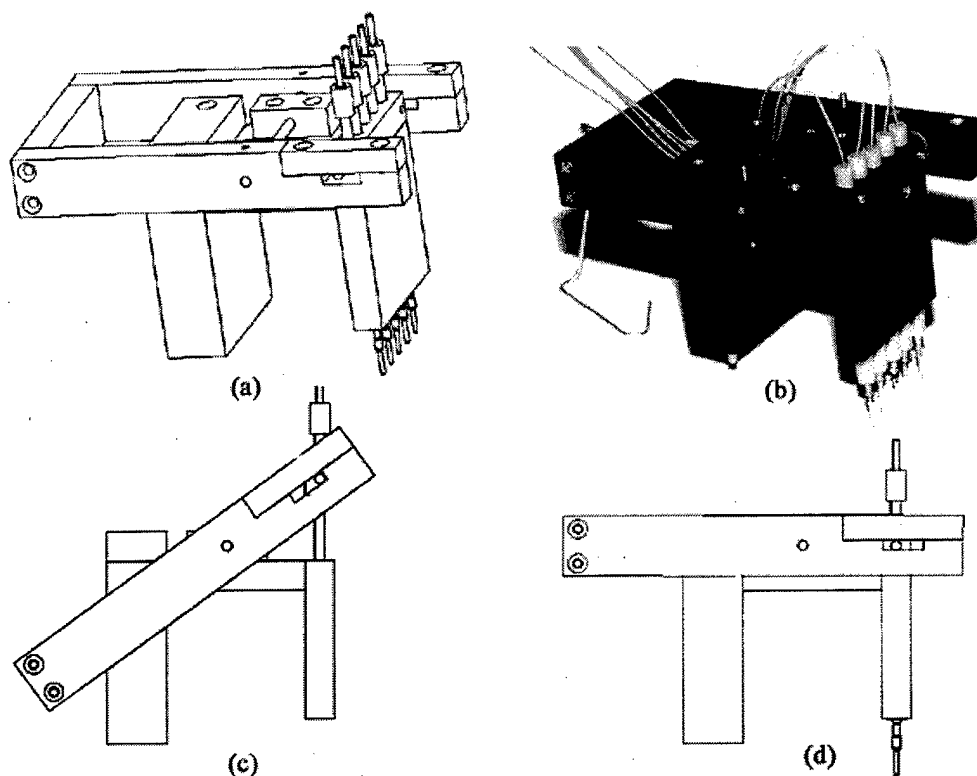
Electrical interconnect: (a) Isometric view (b) Actual device fabricated and used for experiments (c) Side view in retracted configuration (d) Side view in extended configuration.
